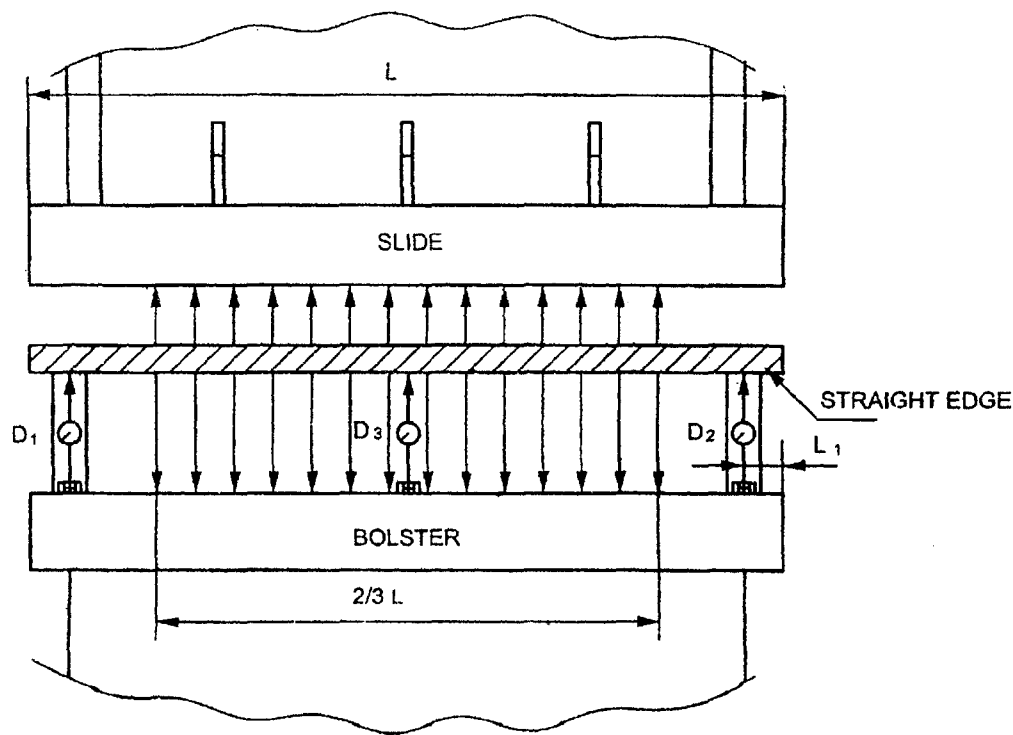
STRAIGHT SIDED HYDRAULIC PRESS
